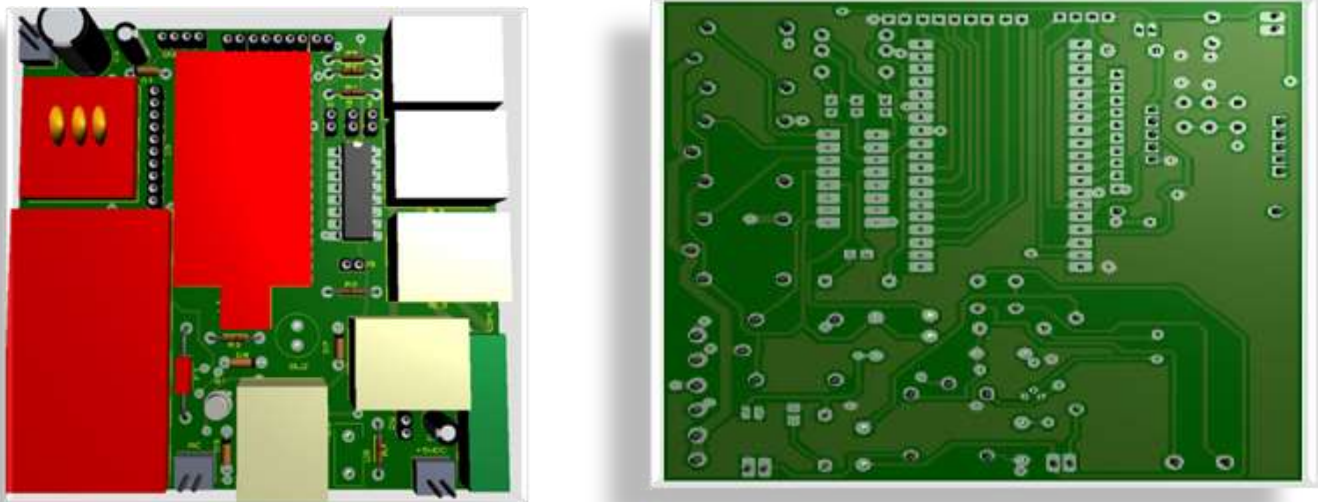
The 3D view of PCB layout and its Surface mount pinout configuration
